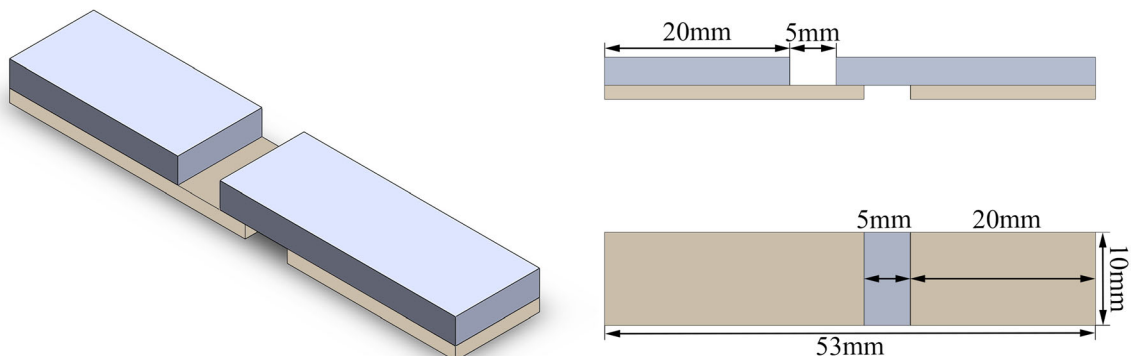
Schematic drawing of machined specimens for the bonding test.
